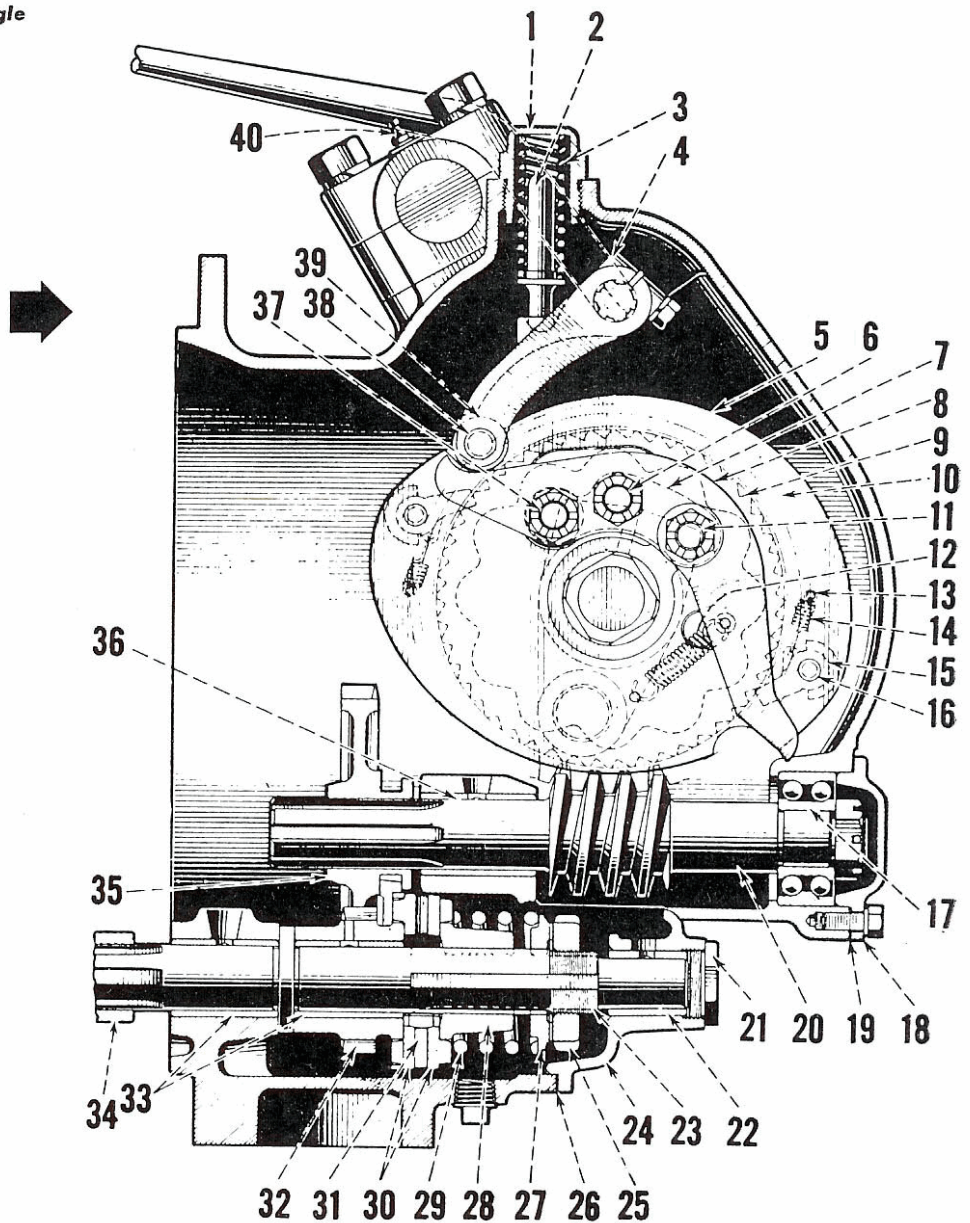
Model F20 bolster and steering gear assembly. Model F30 is similar.
